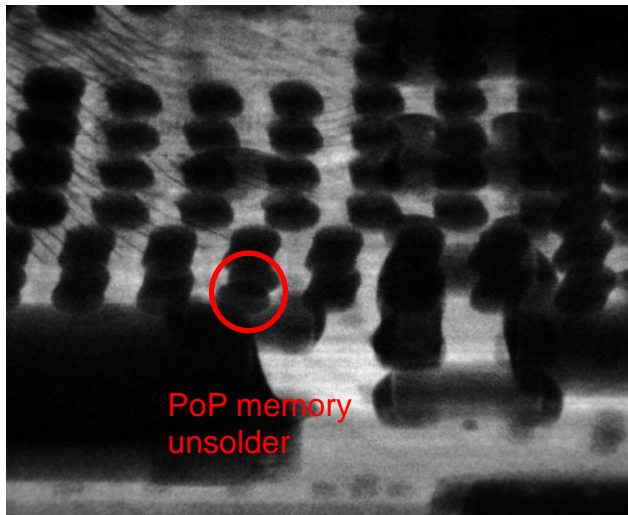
X-ray Image of Assembled POP Using Solder Paste and Flux.
